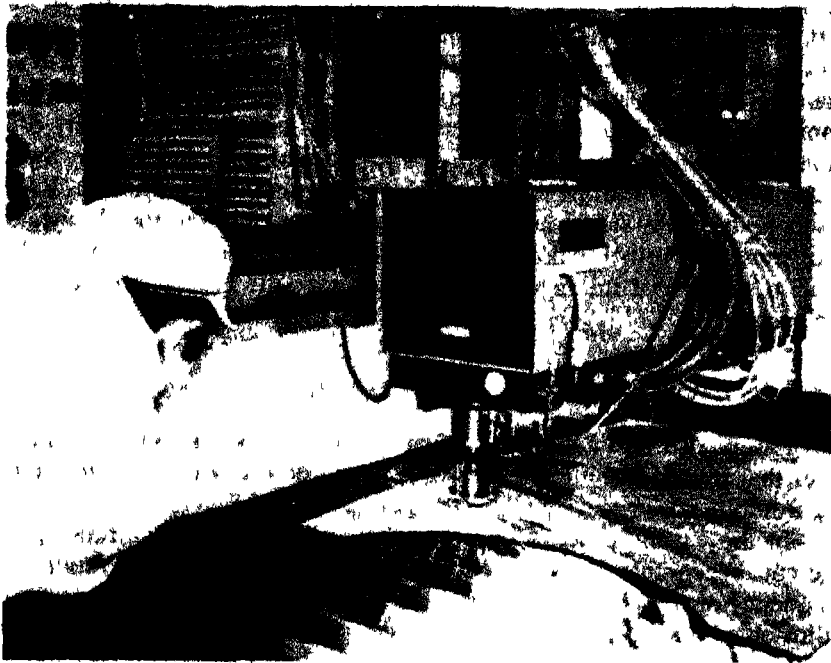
7 Cutting wood with a gas-jet-assisted carbon dioxide laser (Photograph courtesy Ferranti Ltd )
